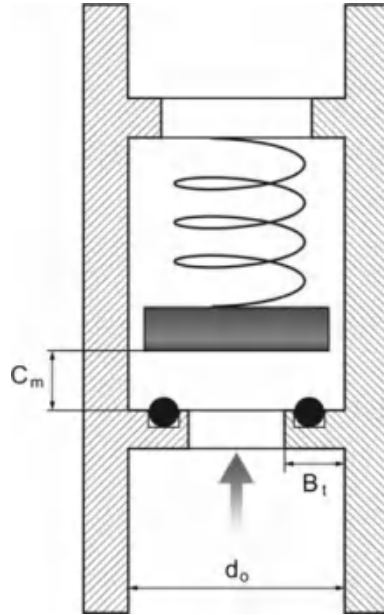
Schematic drawing of the geometry of a pump's check valve
